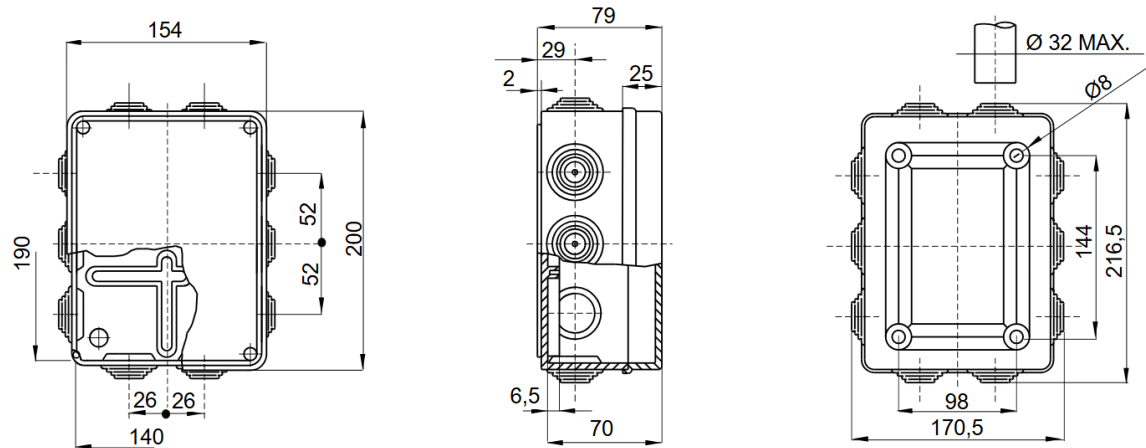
electric box (control device PCB) dimensions 154 x 200 x 80 mm
